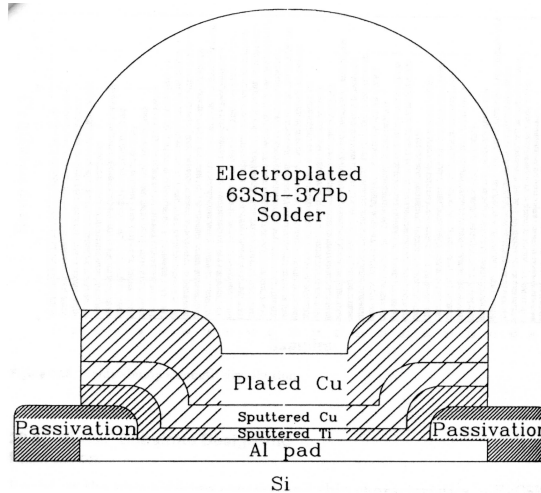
Electroplated solder in a NuCSP package from EPS⁵
